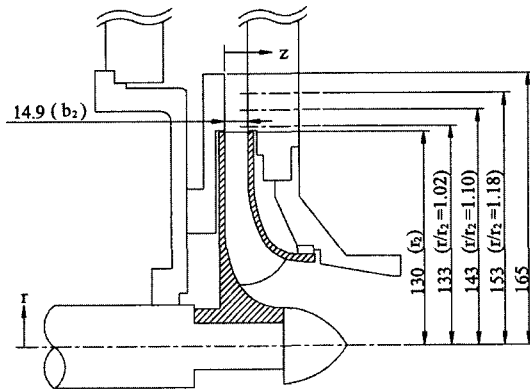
Cross section of the impeller and diffuser and the locations of measurements; $r/r_2=1.02$, 1.10 and 1.18
